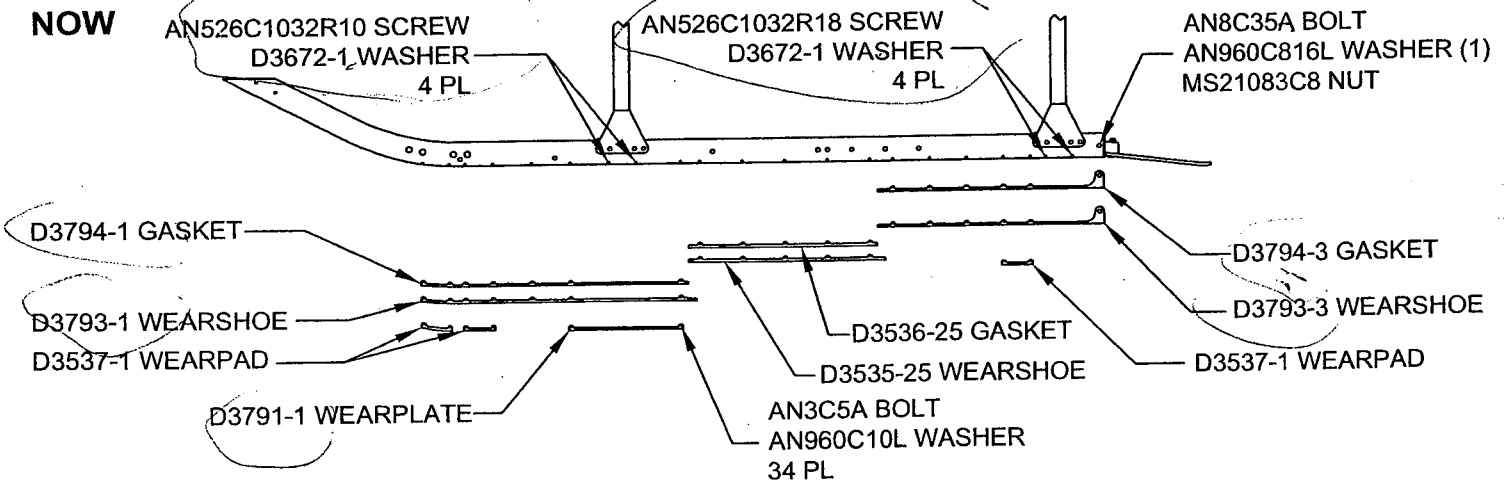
D350-636-011/-012/-013/-014 AT CHG 004 AND INSTALLATION OF DSI 9413-011
